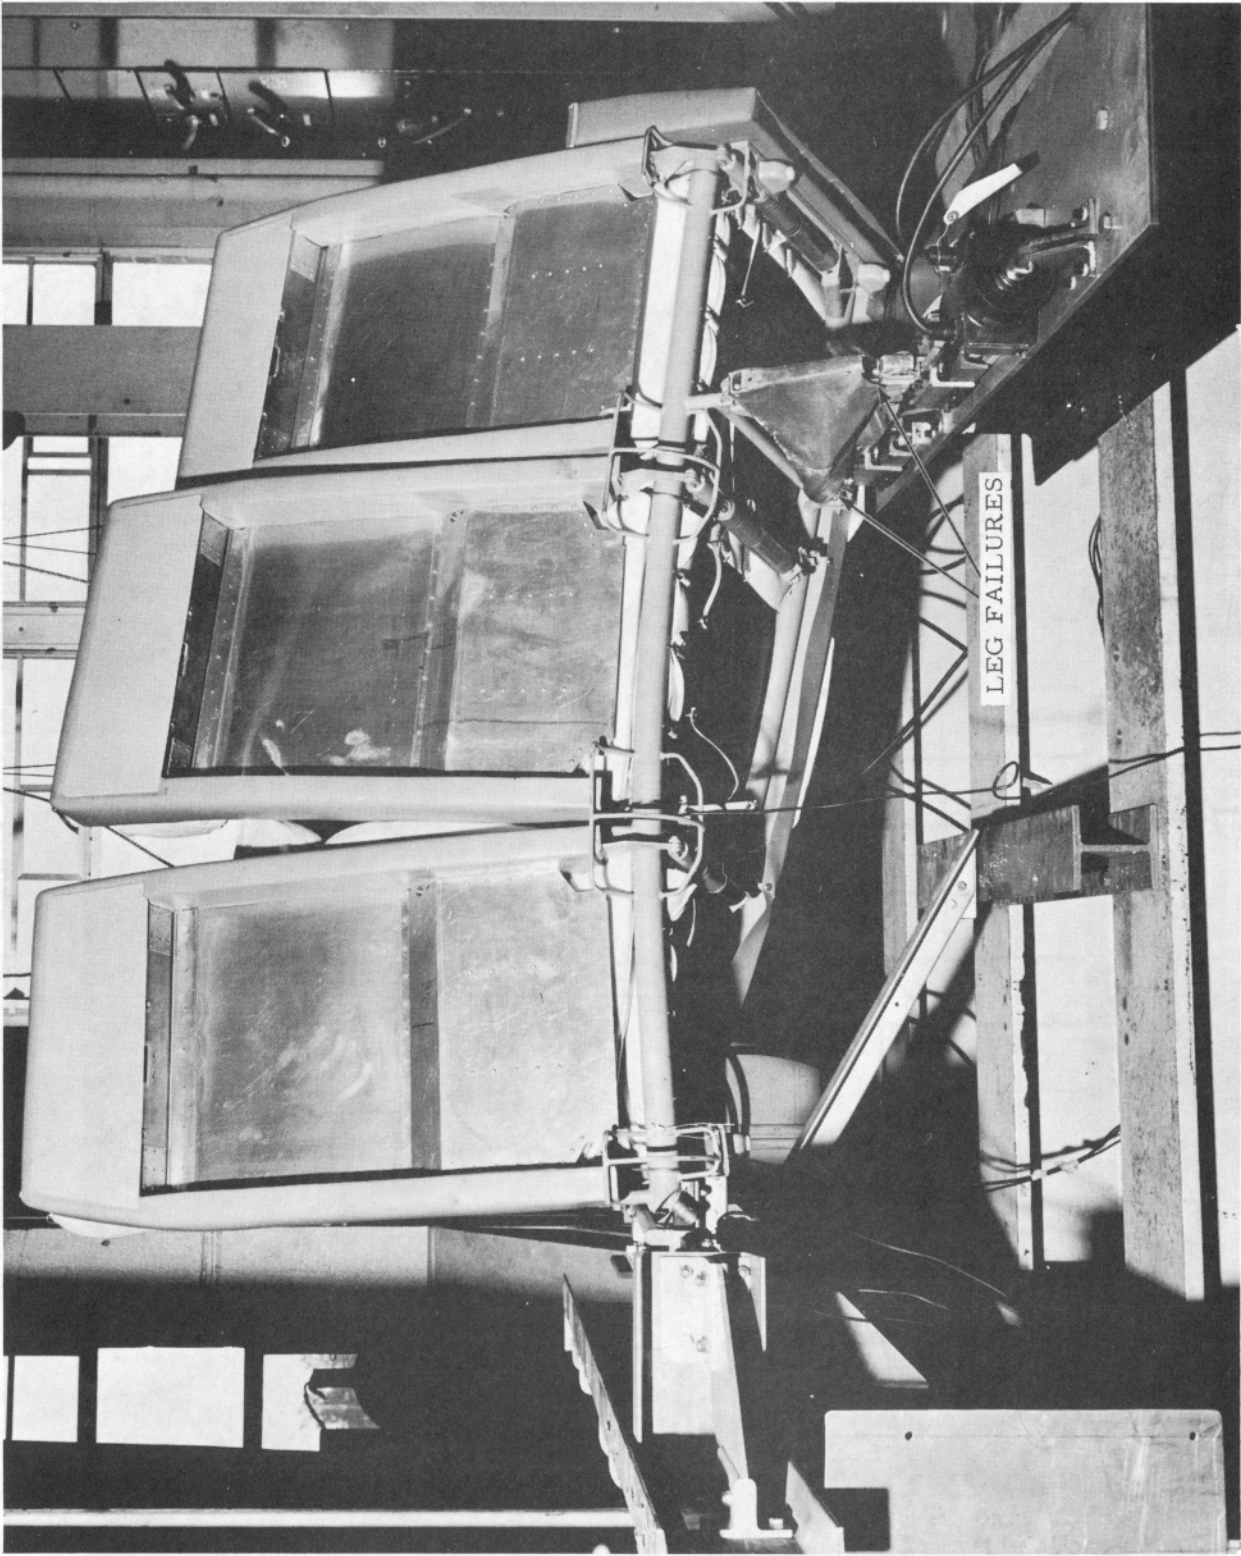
REAR VIEW OF SEAT C-5 AFTER TEST NO. 84
